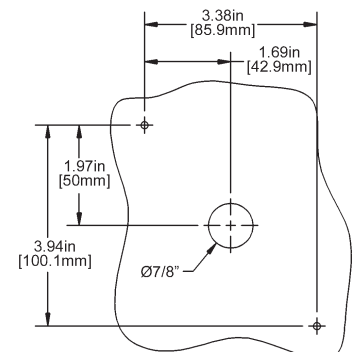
Weatherproof (WP) Enclosure mounting holes
